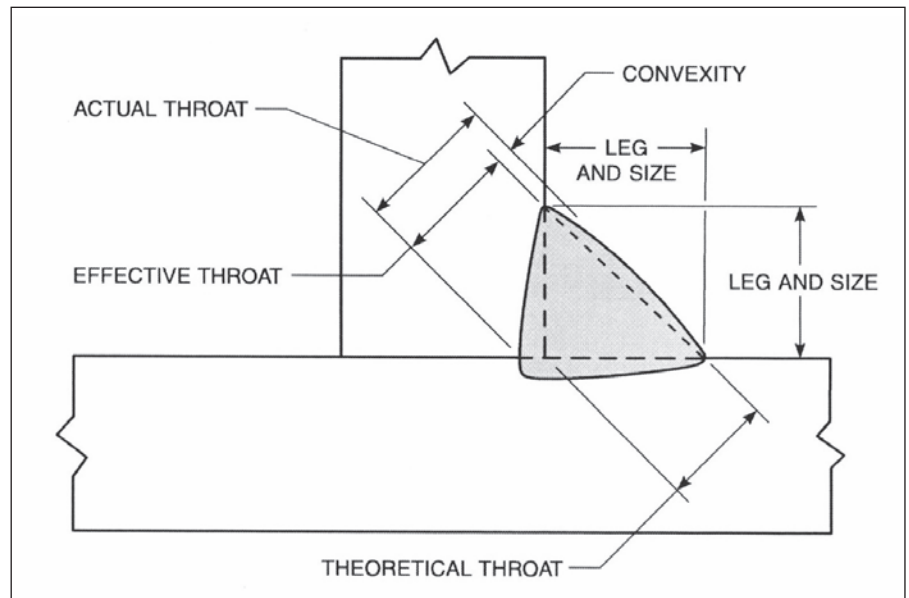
Fillet weld geometry (Credit: AWS A3.0M/A3.0:2020, Standard Welding Terms and Definitions, Fig. B25 [A].)
